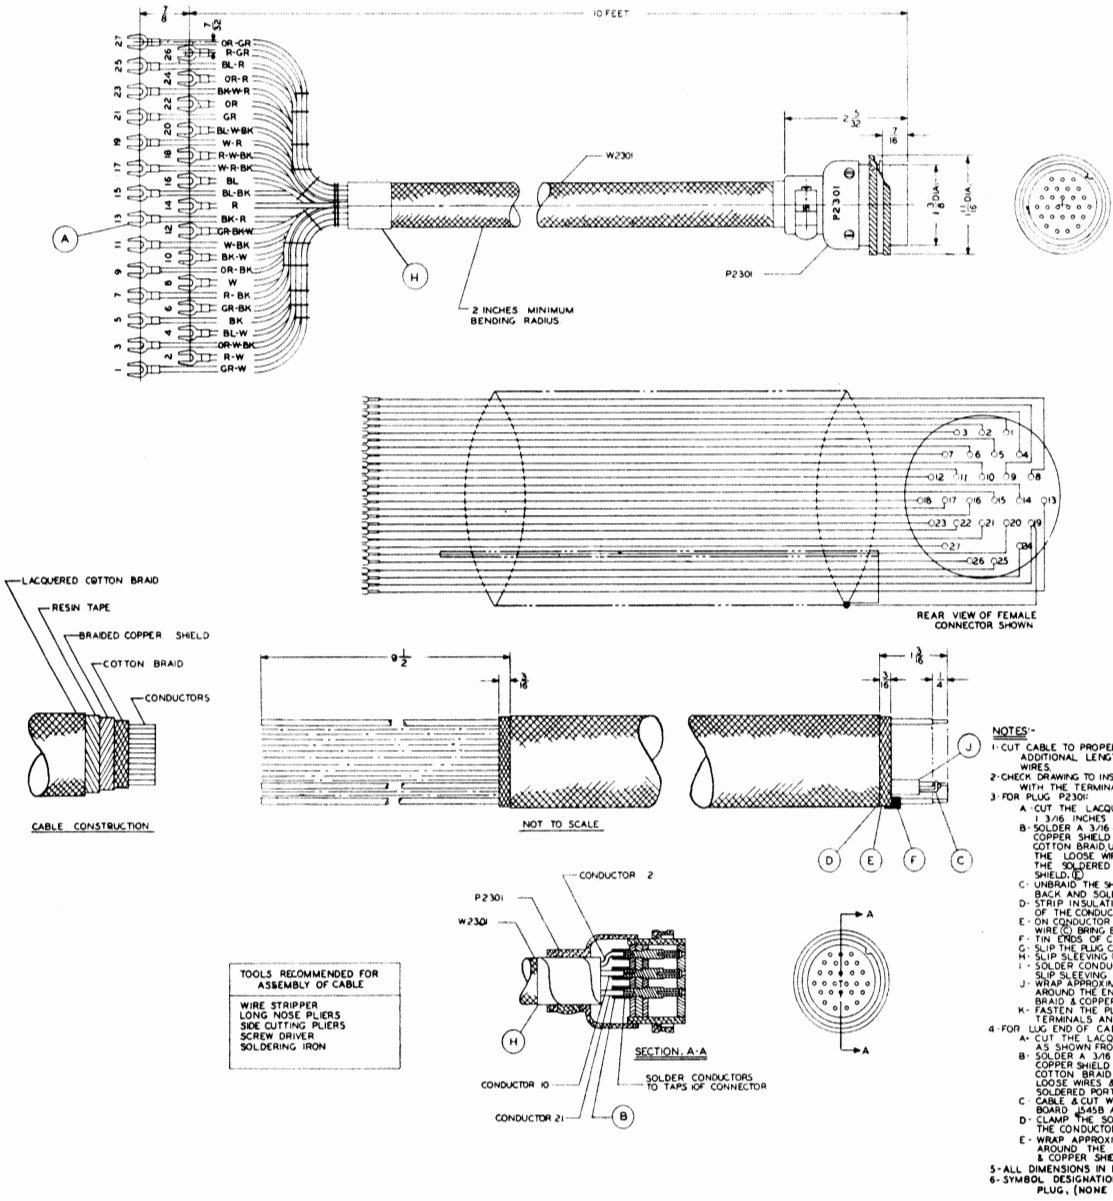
65X-9 Antenna Loading Coil Cable Assembly Diagram
